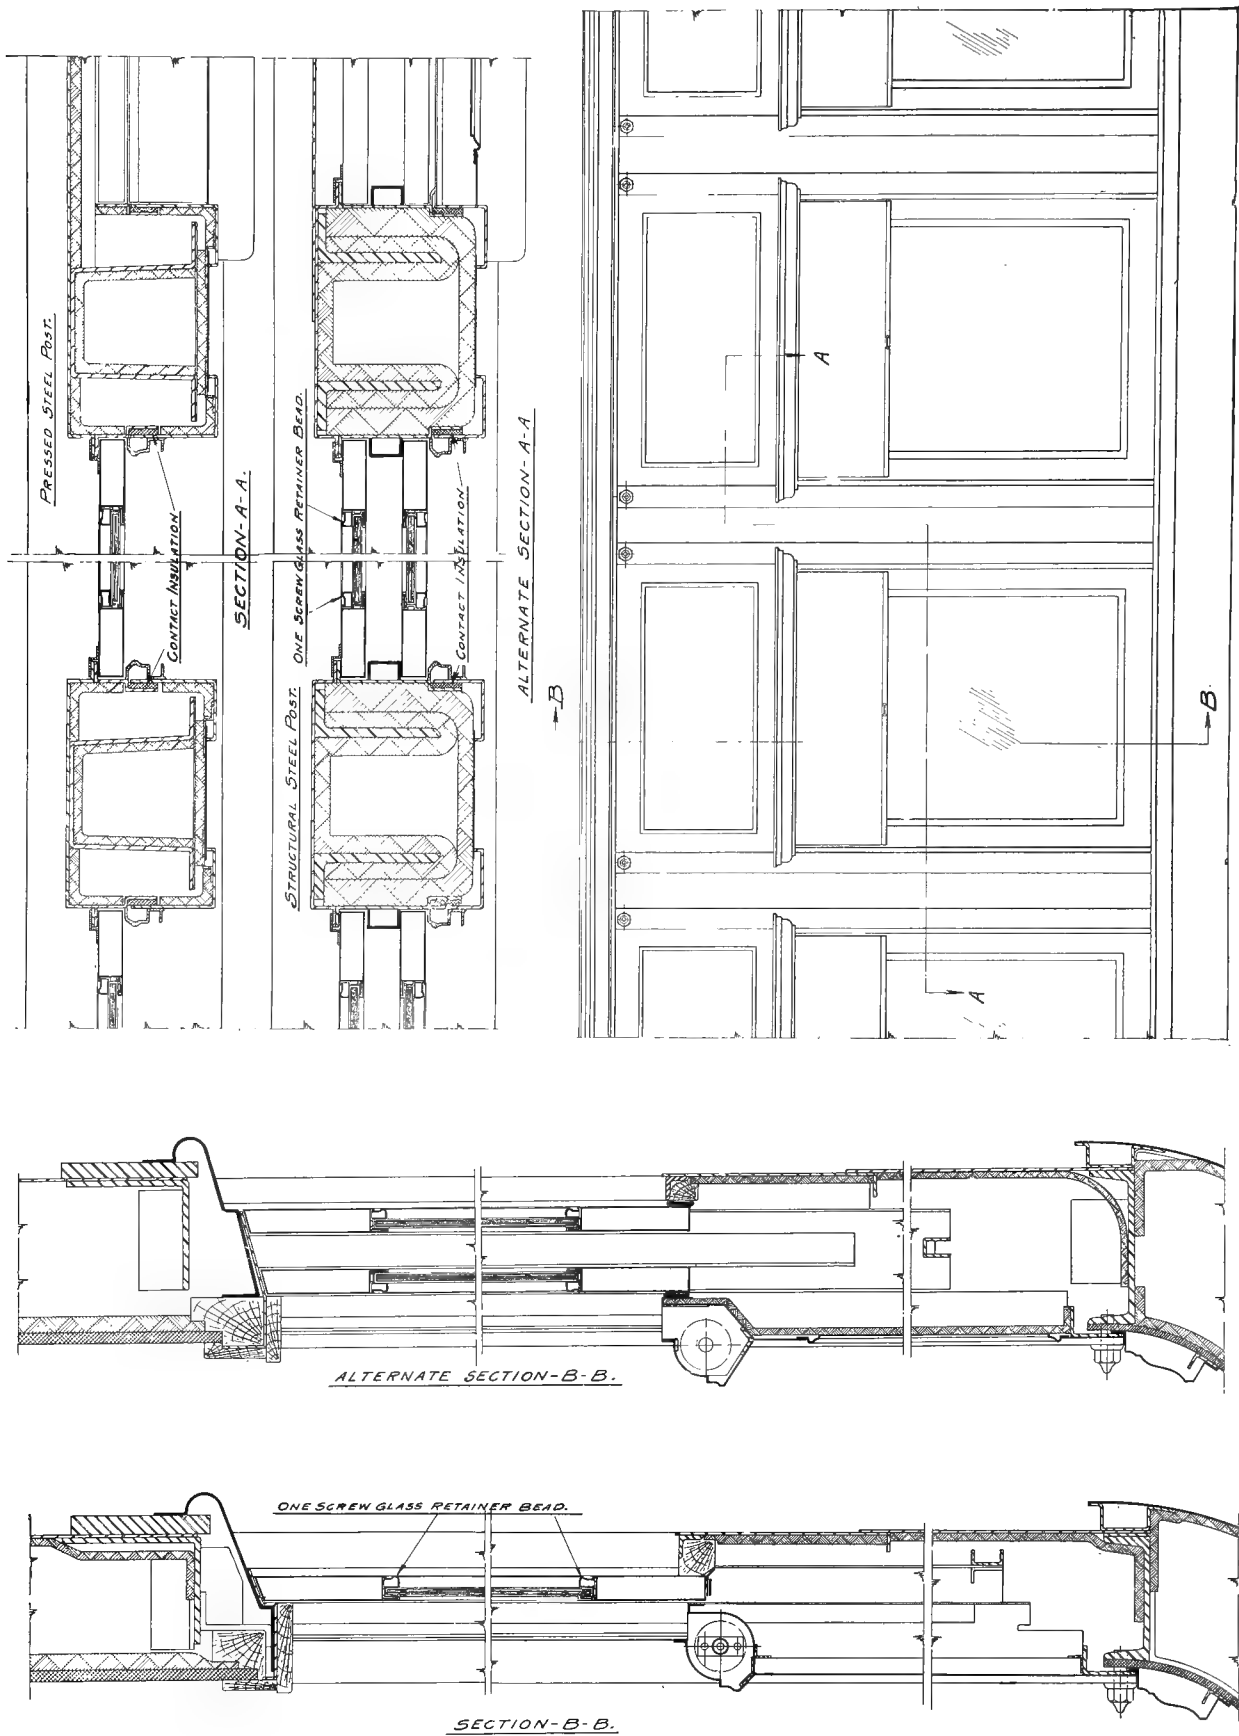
Integral Window Frames for Steel Passenger Equipment. The Hale & Kilburn Company.
